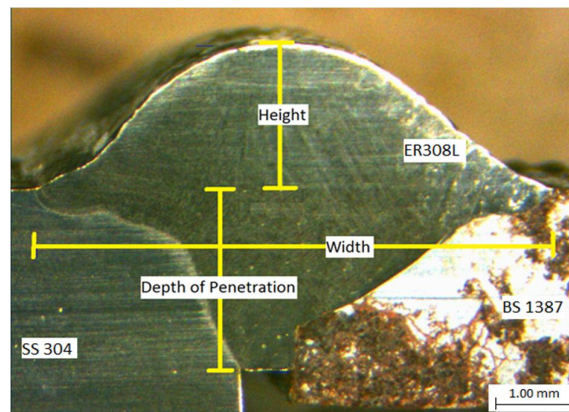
Cross section of the weldment of SS304 and BS1387.
